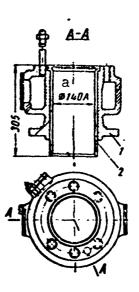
Cylinder of second stage: 1) cylinder; 2) bushing.
